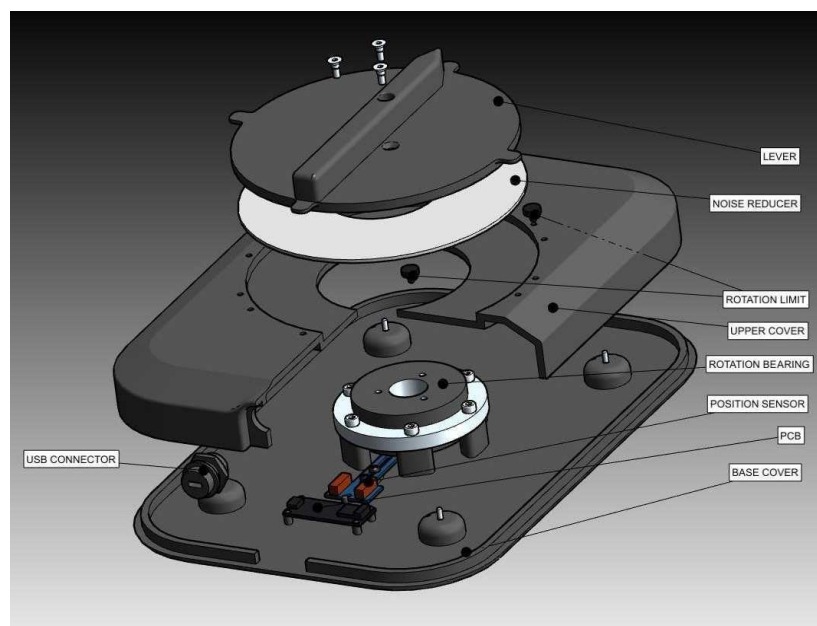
Isometric View of the Device. Exploded isometric view of the TaK device showing the main mechanical components, including the base cover, rotating board, shaft, and internal sensing components.
